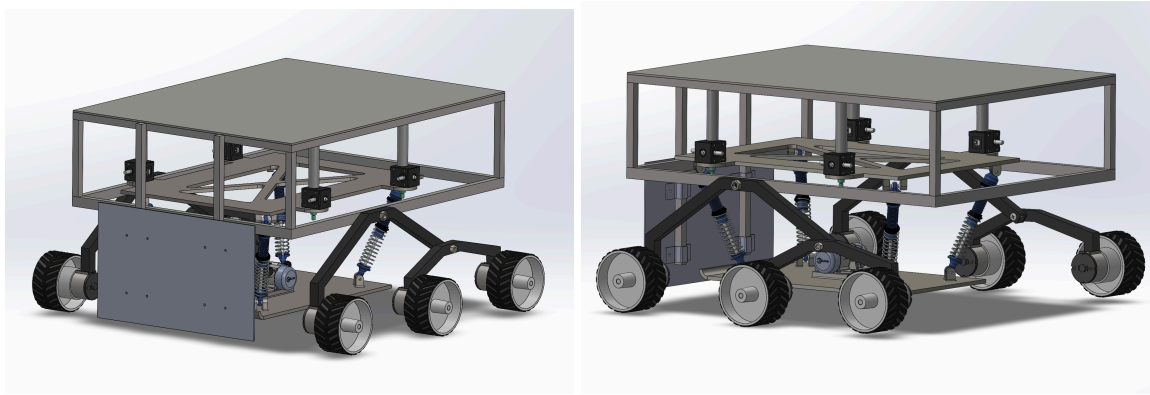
CAD Model of Bulldozer mounted to the Chassis
